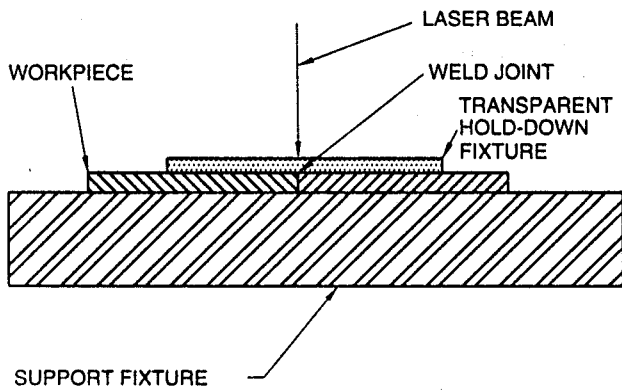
Use of Transparent Hold-Down Fixturing For Flat Thin Section Welding
